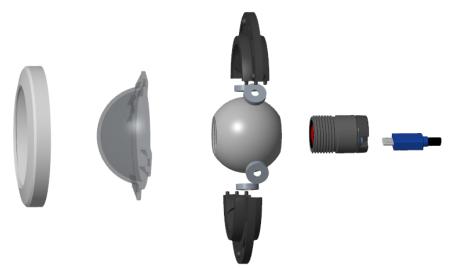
CAD model of the exploded view of the Mini Magnet concept.
